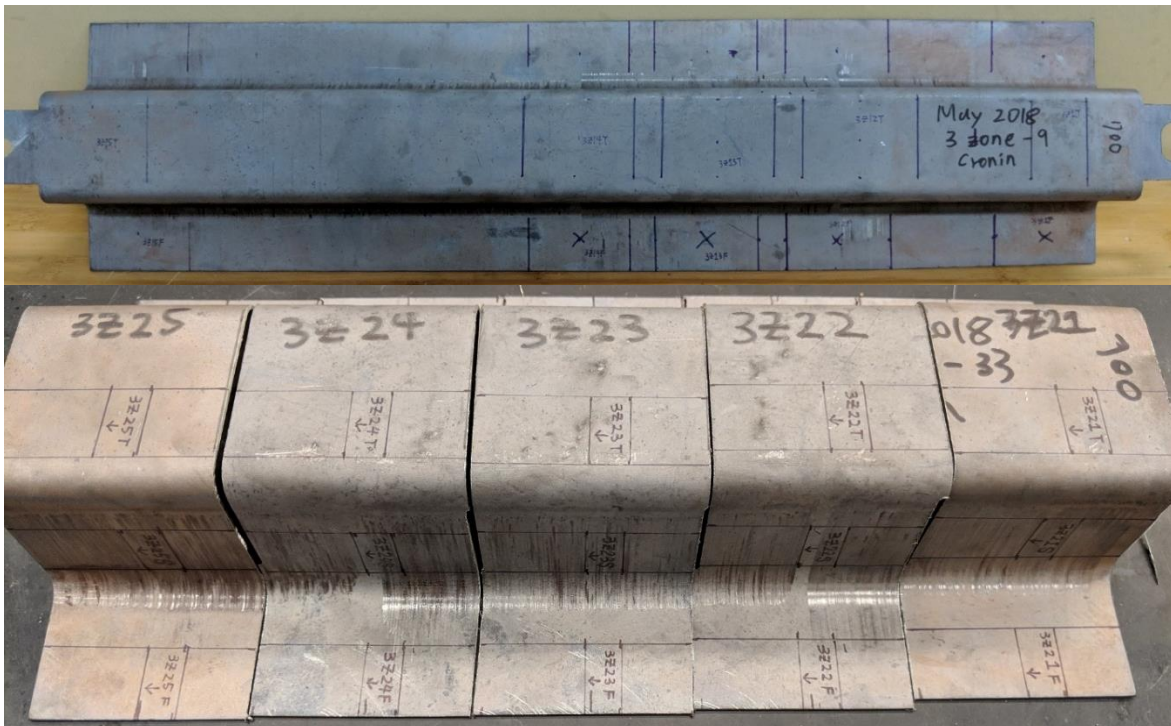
An example of three zone hat section before cutting, and the sections after cutting
